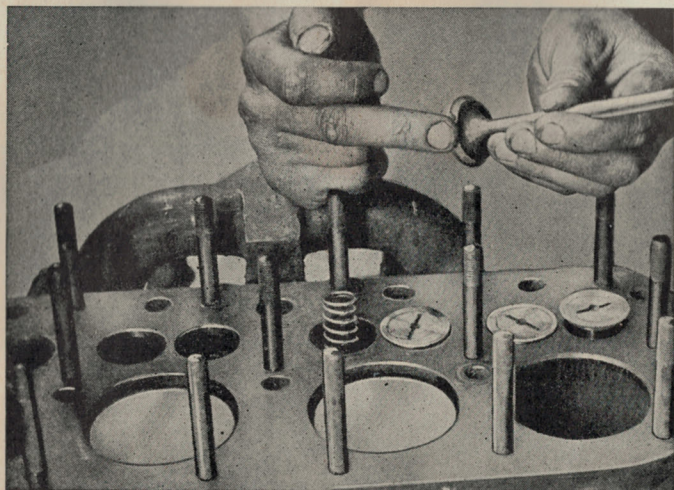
APPLYING GRINDING PASTE TO VALVE
